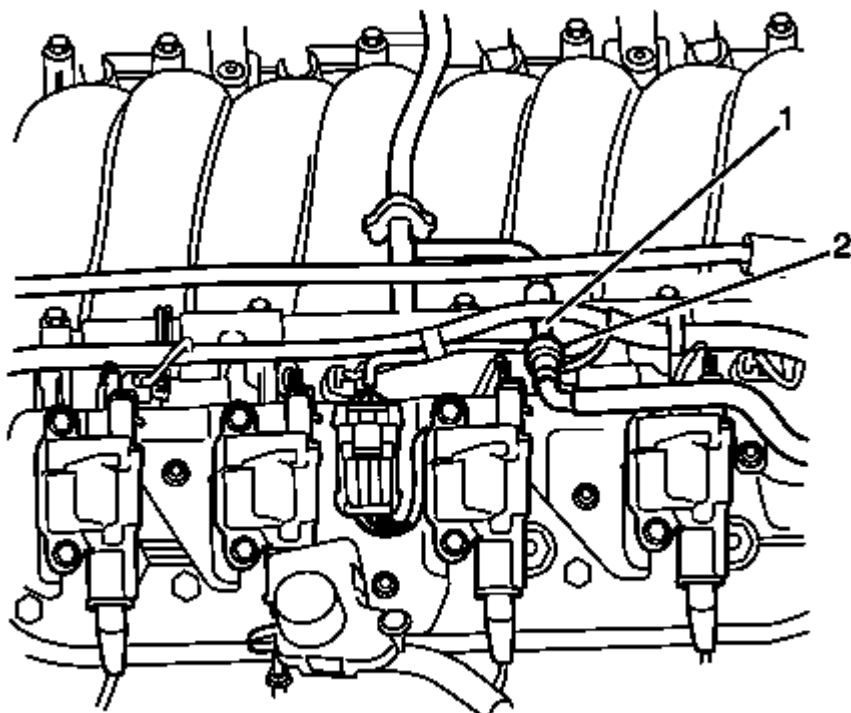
Identifying Fuel Rail Tube & Feed Pipe (Left Side)
